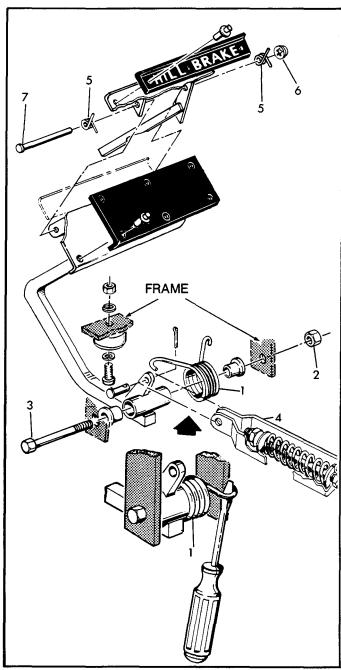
BRAKE PEDAL SPRING REMOVAL
